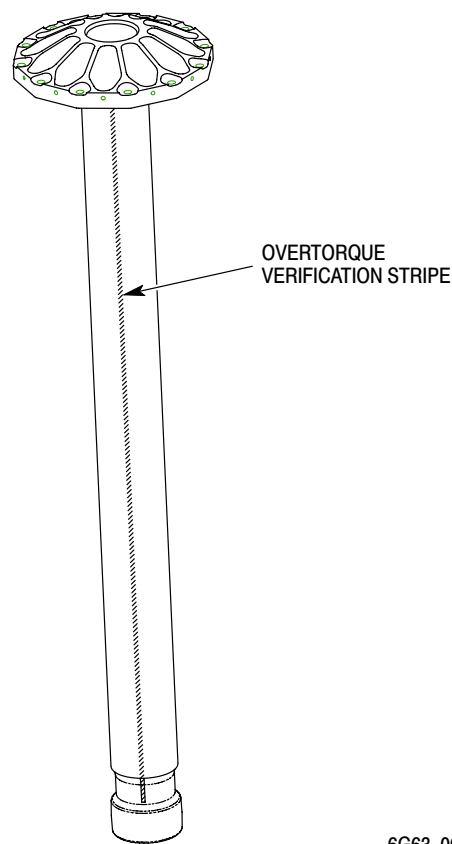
Main Rotor Drive Shaft Inspection
